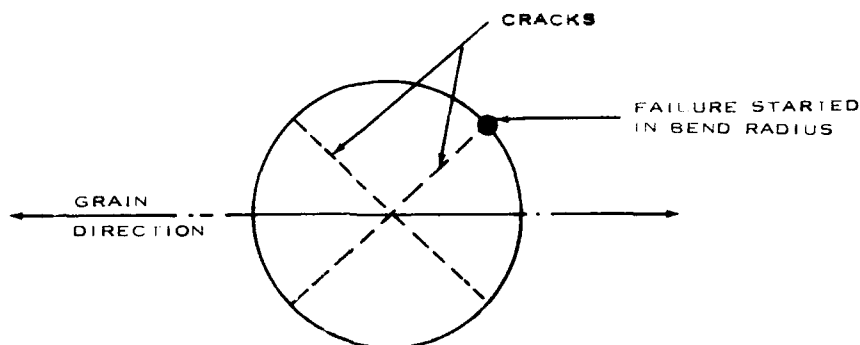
VIEW OF BOTTOM OF CUP SHOWING CRACKING AT 45° TO GRAIN DIRECTION FOR DEEP DRAWING
